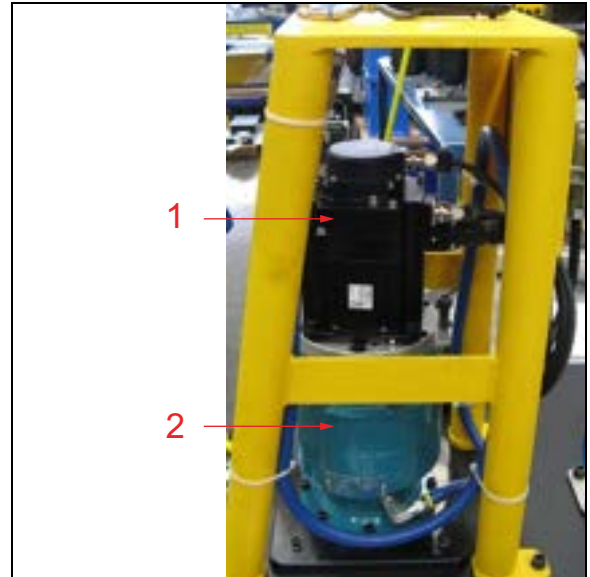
SERVO MOTOR AND GEARBOX
